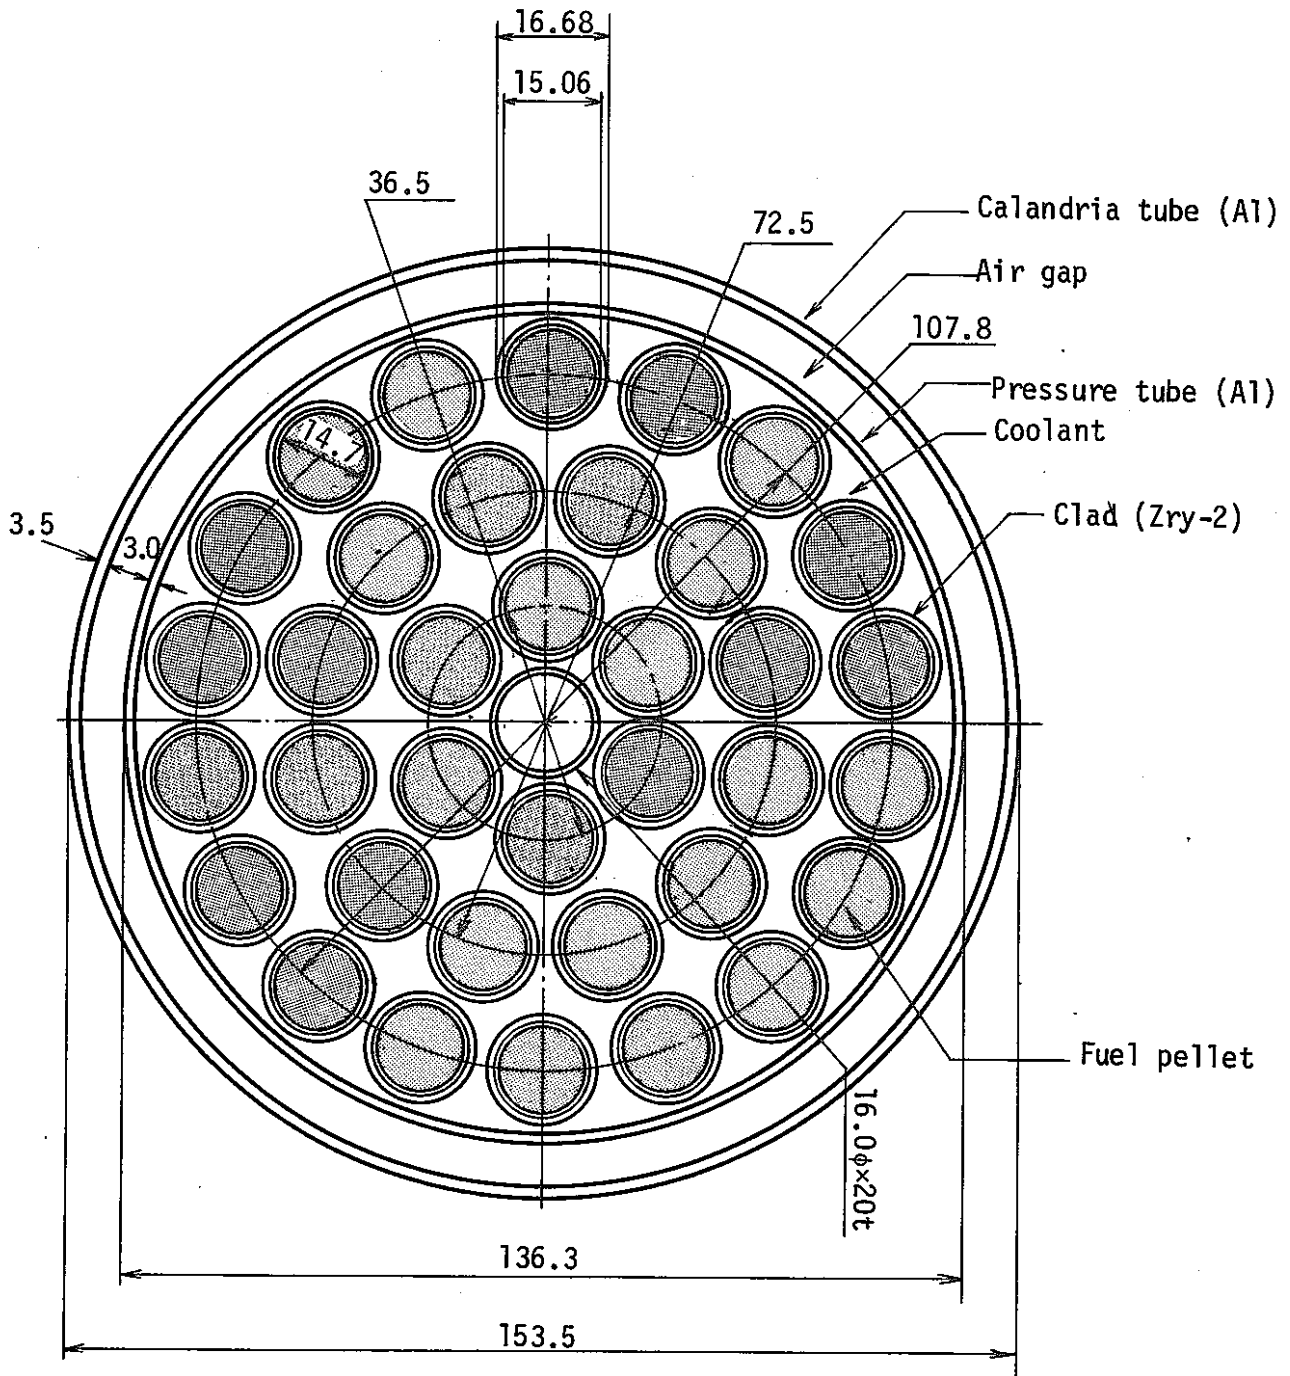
Cross-sectional view of 36-rod PuO₂-UO₂ fuel assembly
